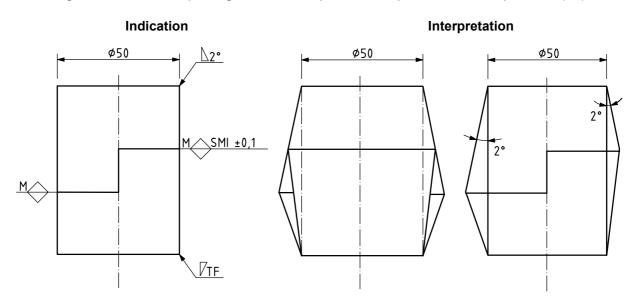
Stepped parting surface on a part with a specification of taper to fit (TF)
